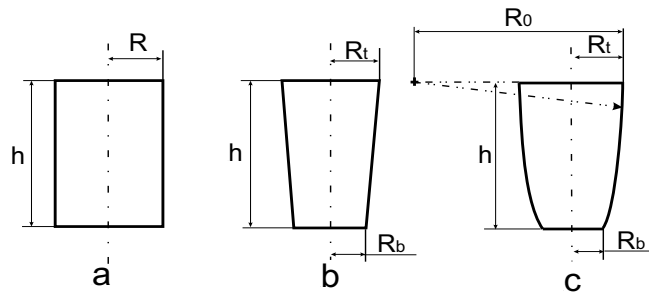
Geometries of cutting tools. $R = 5mm$, $h = 50mm$, $R_t = 7mm$, $R_b = 4mm$, $R_0 = 418.17mm$. a). a cylindrical tool. b). a conical tool. c). a barrel tool.
